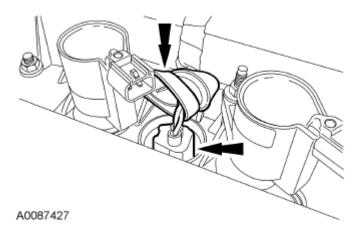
Locating Fuel Injector Electrical Connectors Courtesy of FORD MOTOR CO.
